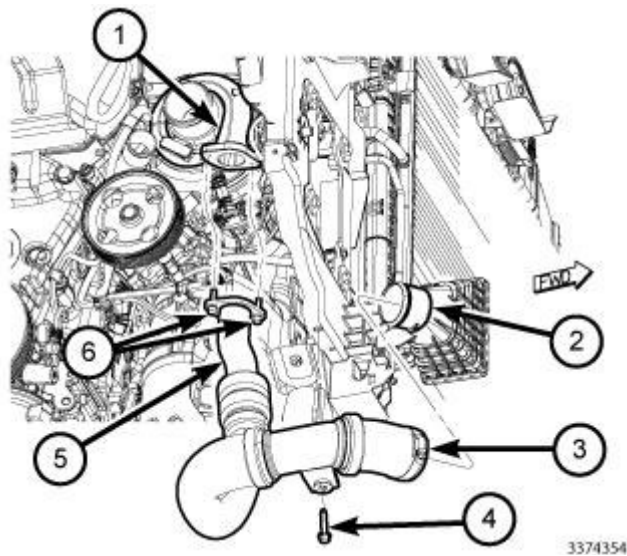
Turbocharger Flange, Charge Air Cooler (CAC), Hose, Charge Air Cooler Tube & Fasteners
